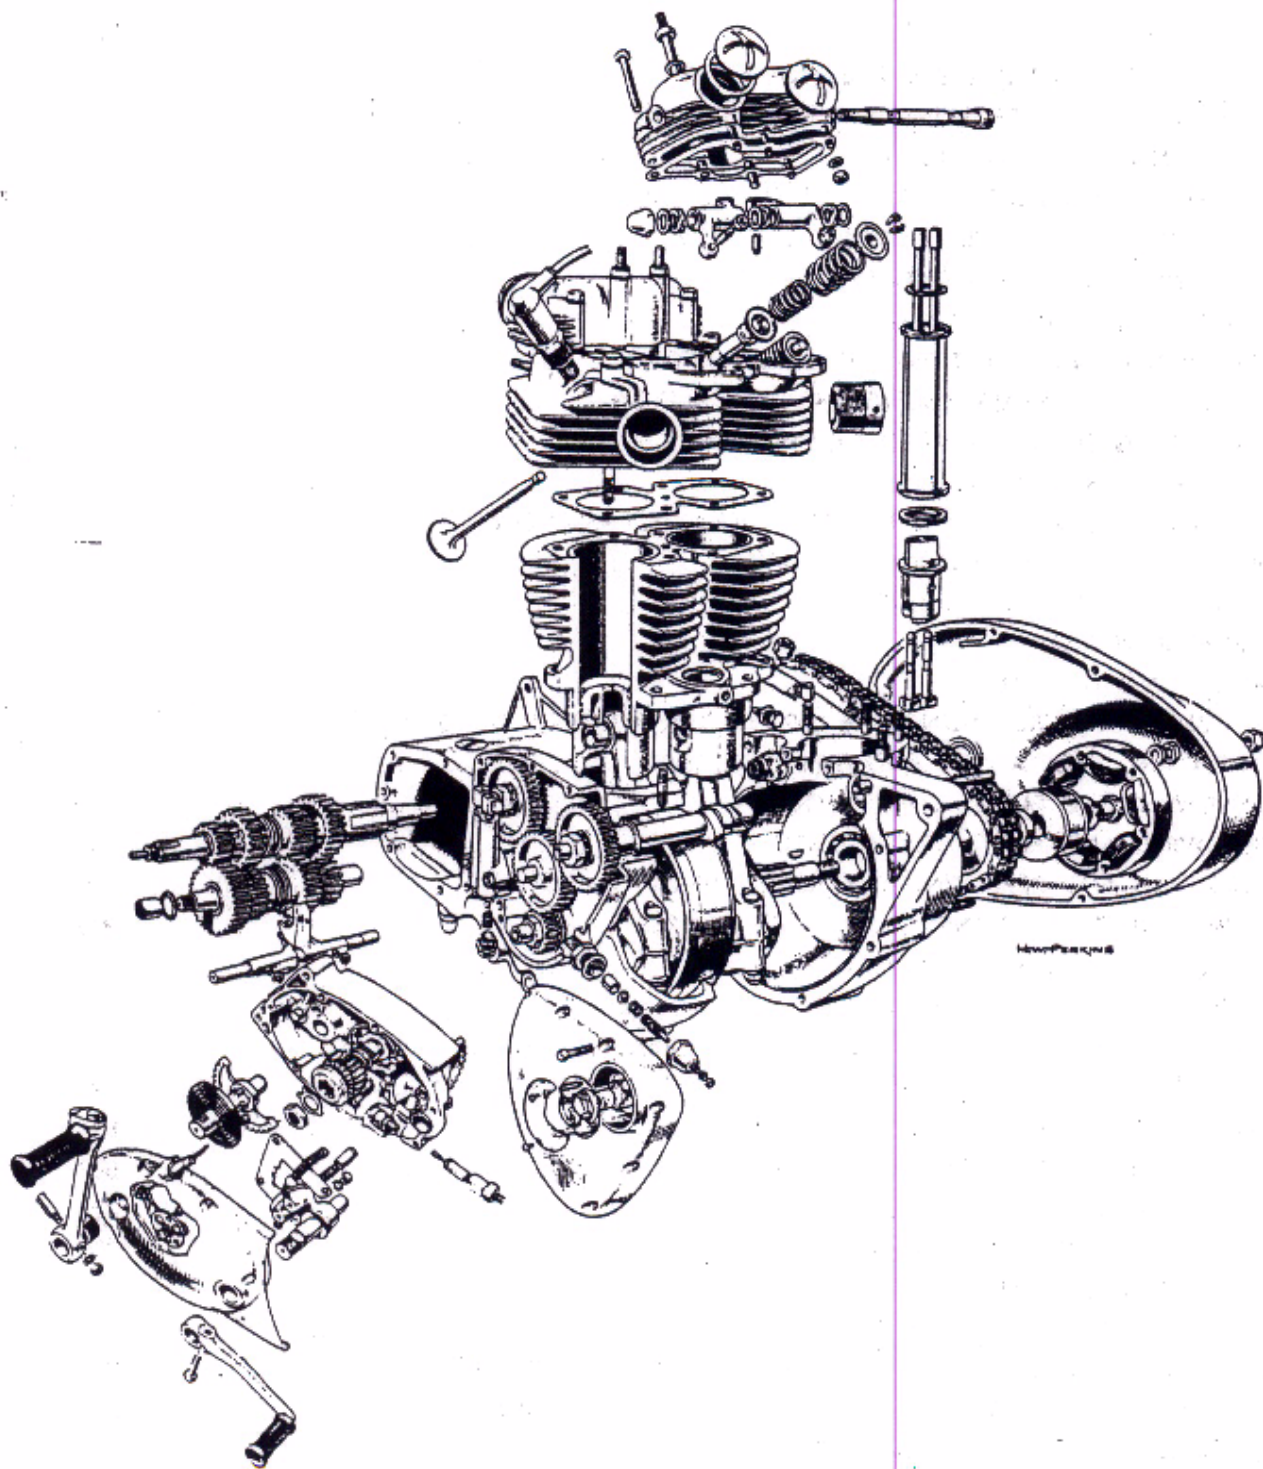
Exploded view of 650 c.c. engine gearbox unit
